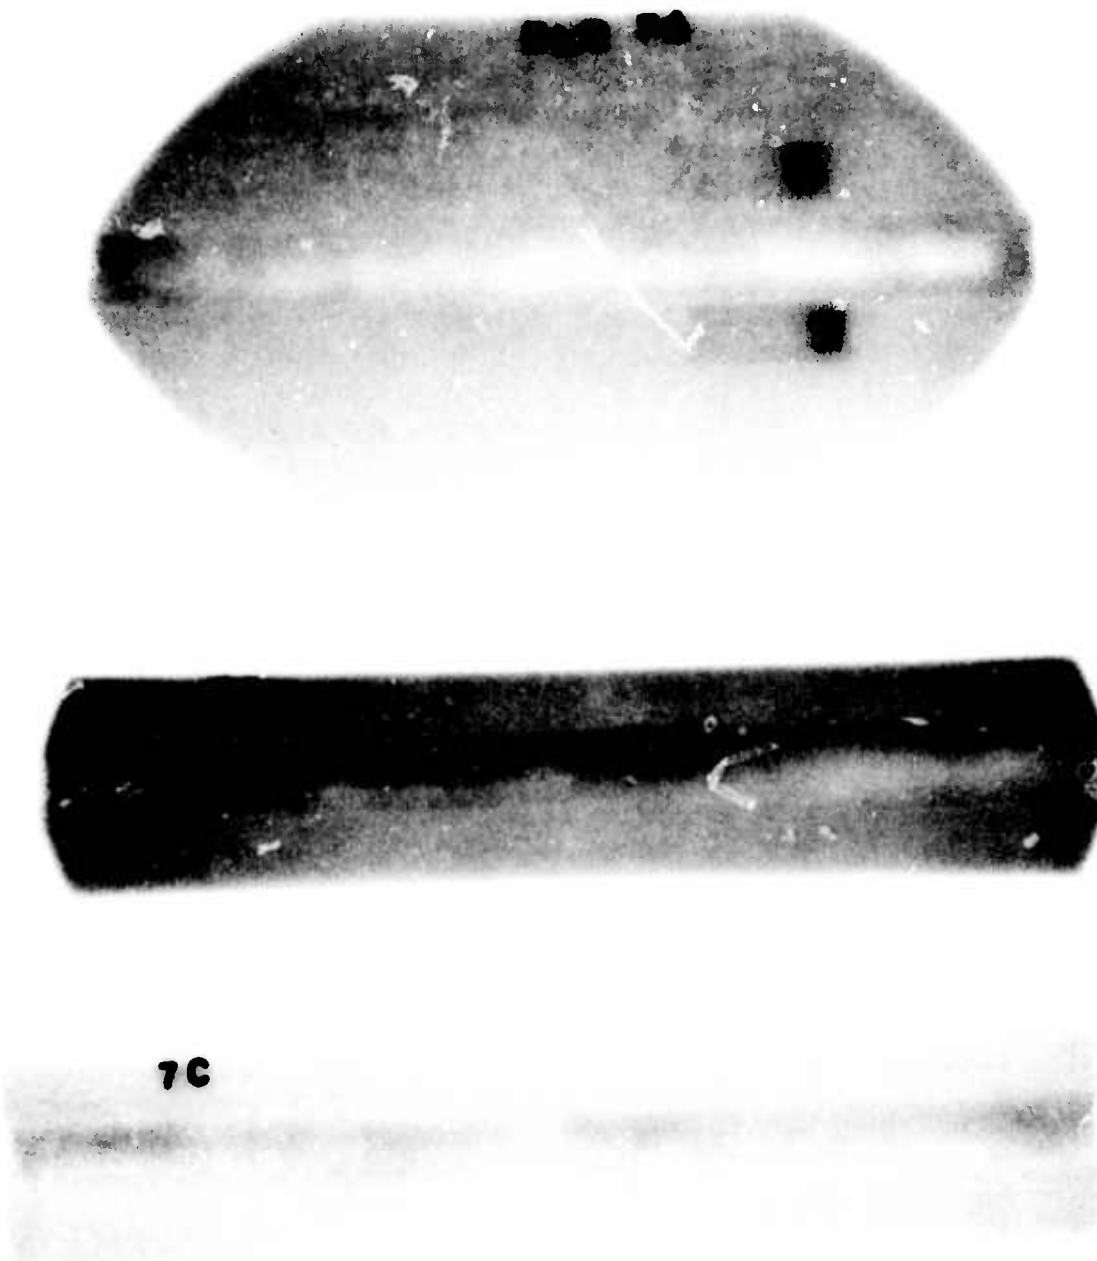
Photographs of GTA weld radiographs
